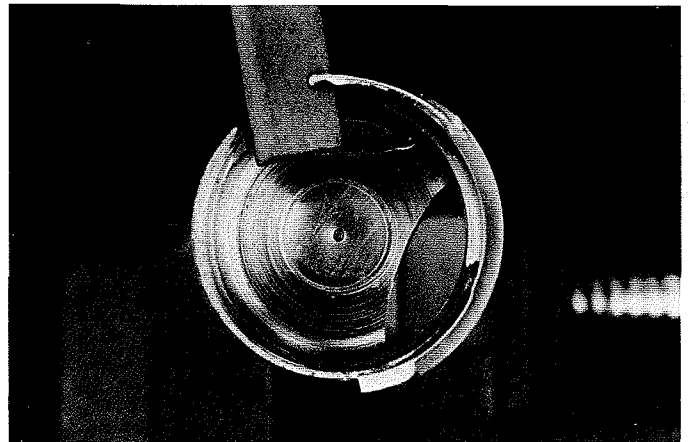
Care must be taken to prevent any accidental altering of the upper edges of the thread stop. If the top edge of the thread stop is rounded off, the thread will jam between the thread deflector and the thread stop causing thread breakage.
